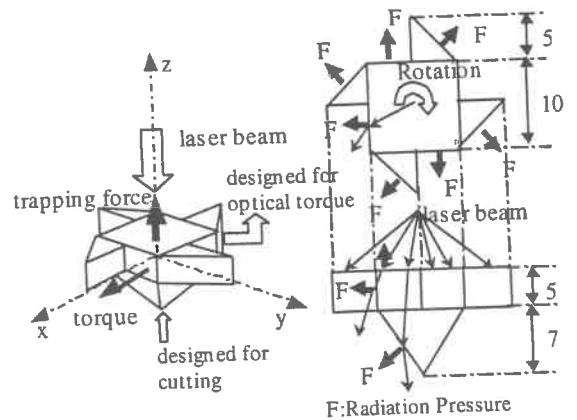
Designed Tool Trapped by Focused Laser Beam for Micro-machining. The Dimension of Length is μm .
